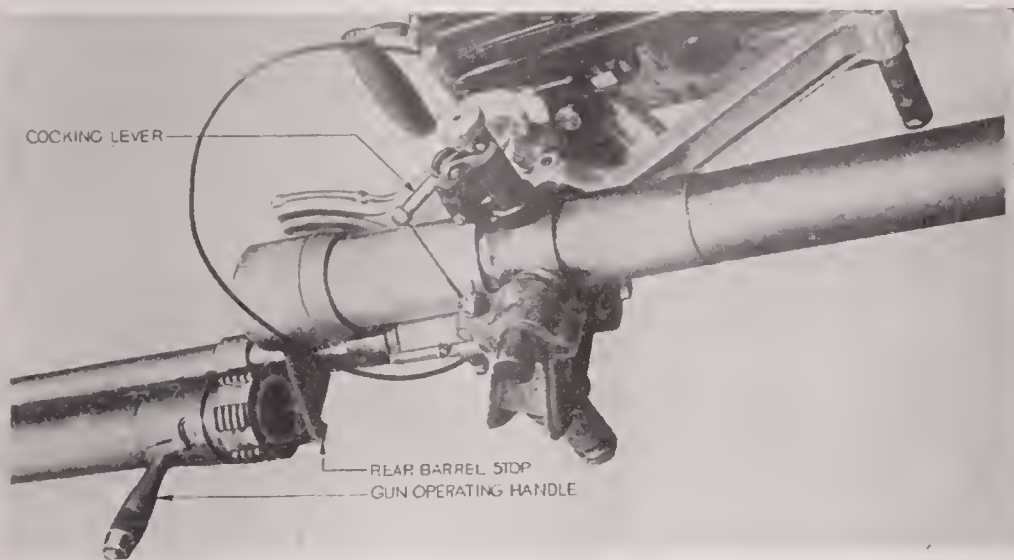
BREECH OPEN. NOTE POSITION OF GUN-OPERATING HANDLE AND COCKING LEVER.
